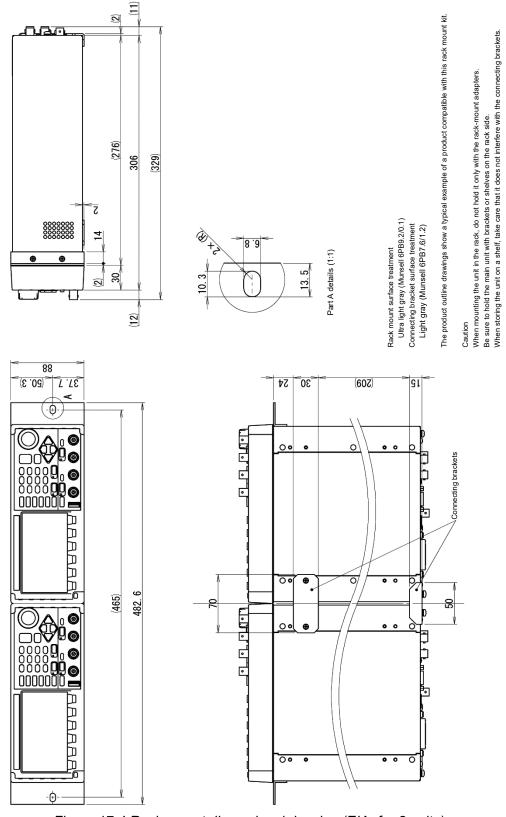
Rack mount dimensional drawing (EIA, for 2 units)
